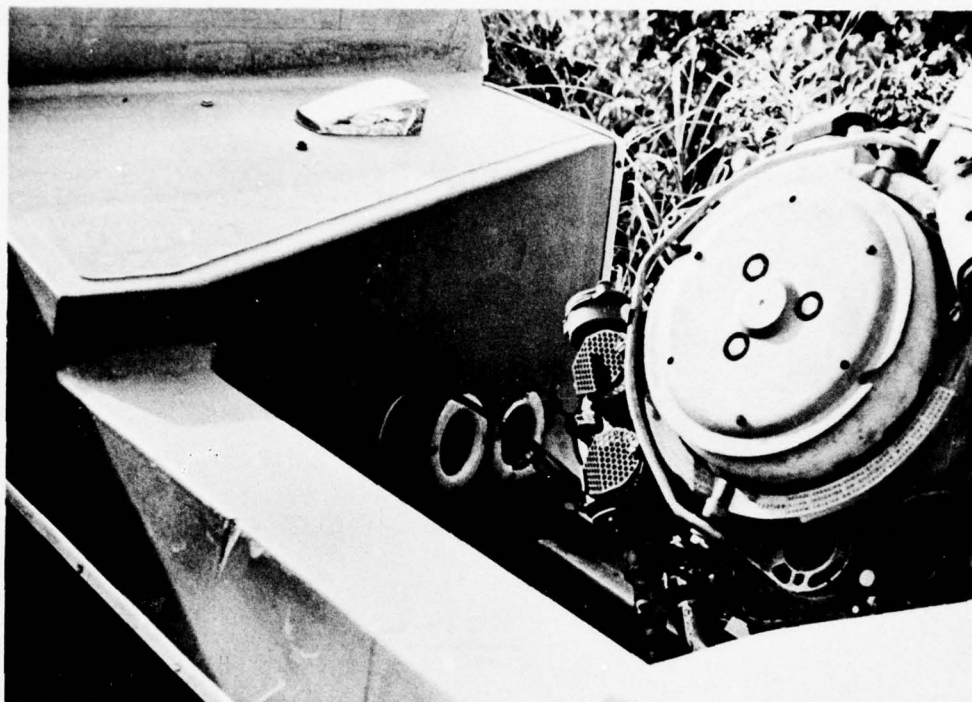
VIEW OF CONTROL CABLE CUTOUTS
